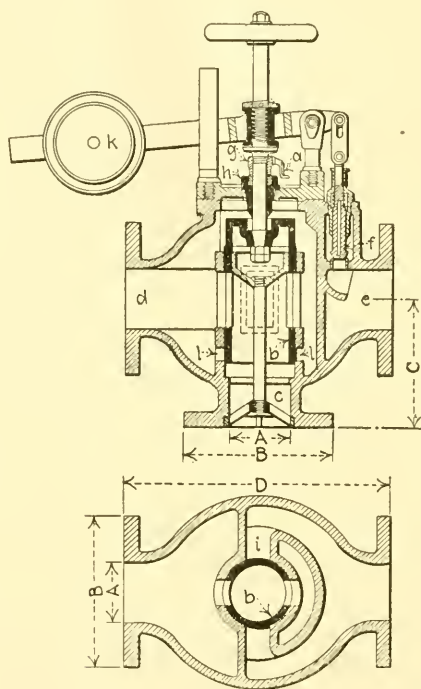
FERRANTI PRESSURE REGULATING VALVE
